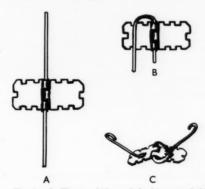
A, The two halves of the hinge are held together by a long piece of wire. B, The wire is bent and soldered or welded to the face of the one flange. C, The wire is now bent out at an angle to this flange, and another piece of wire of the same diameter is attached to the other flange.
